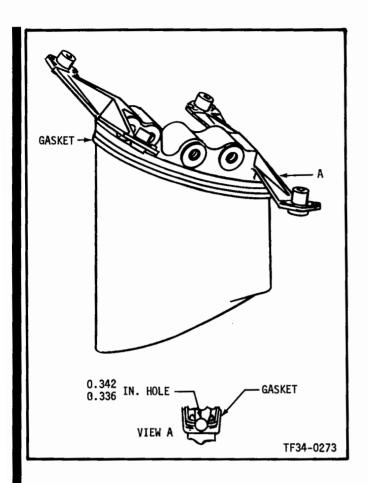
Fan Stator 6 O'Clock Drain Strut and Gasket Inspection
